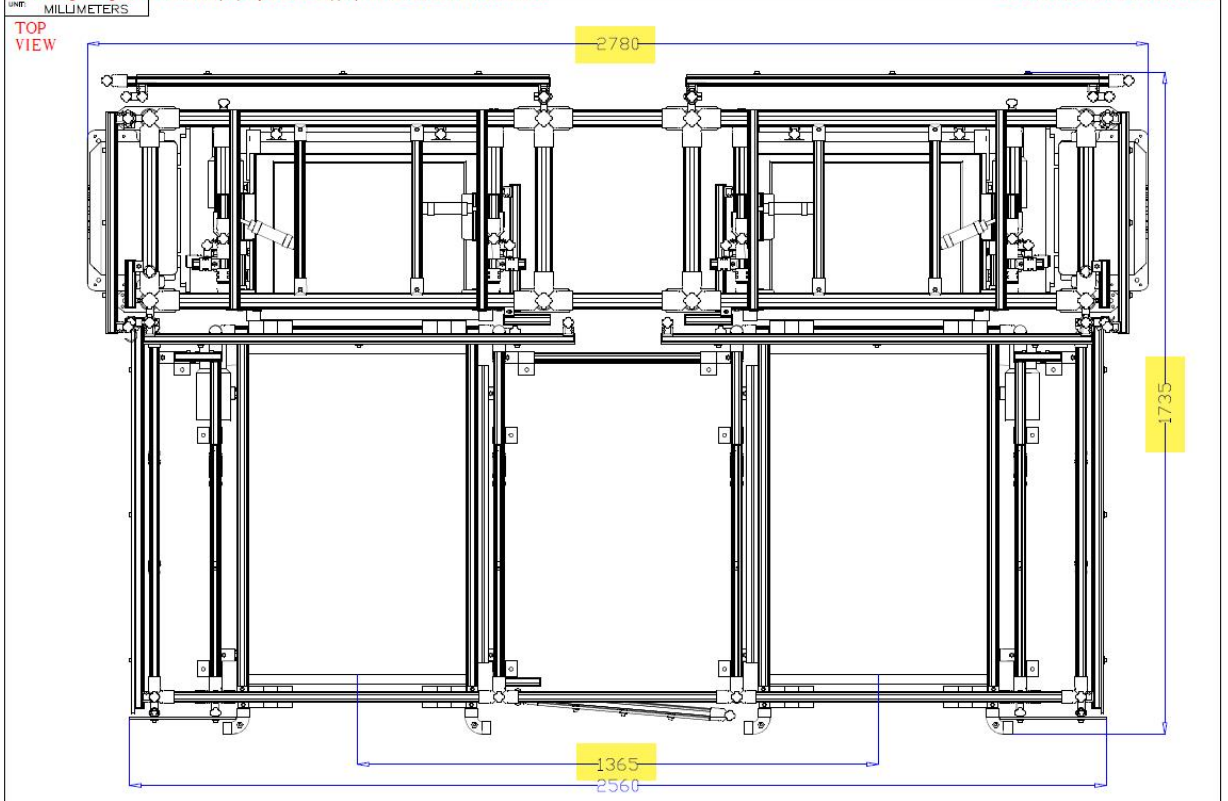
RFP Definition of Operator Table and Roller Table Dimensions (In Inches)
